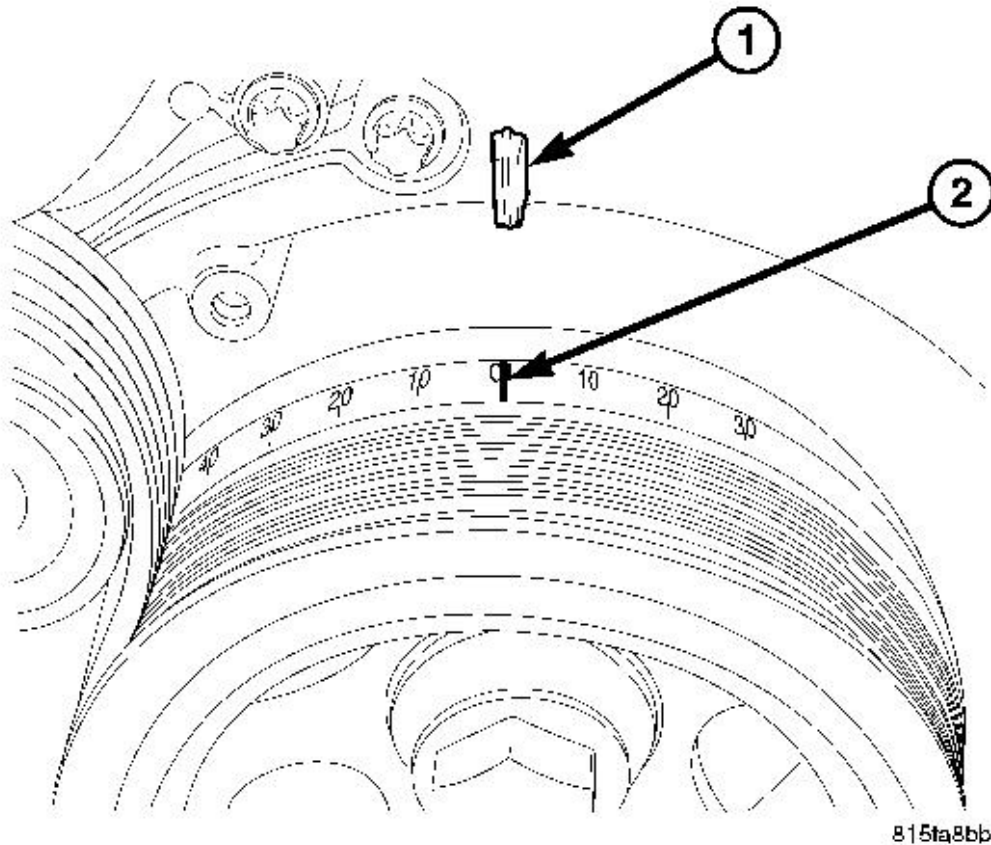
Identifying Timing Cover And Damper TDC Marks
